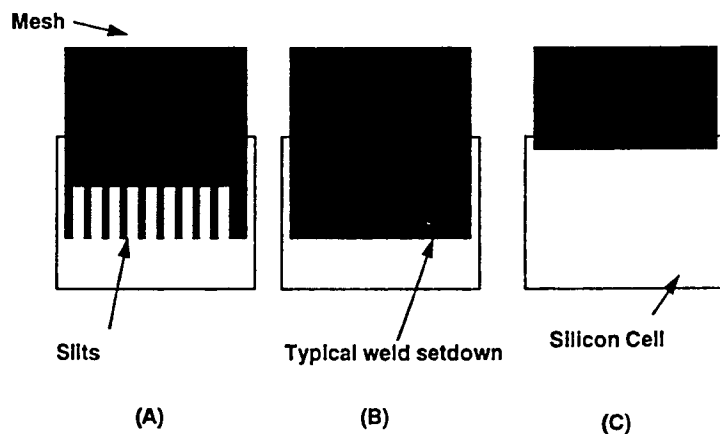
Schematic of basic cell designs tested in this study. (A) P-side sample with slits in mesh; (B) original P-side design with typical weld setdown location delineated; (C) basic design for all N-side welds and P-side edge samples designed to physically resemble N-side welds.
